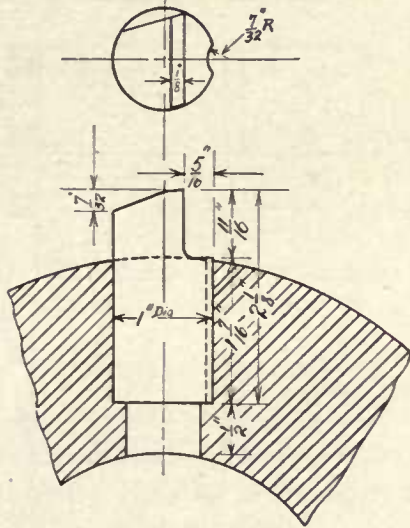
One of the Cutters in Milling Tool for Side Rods.
